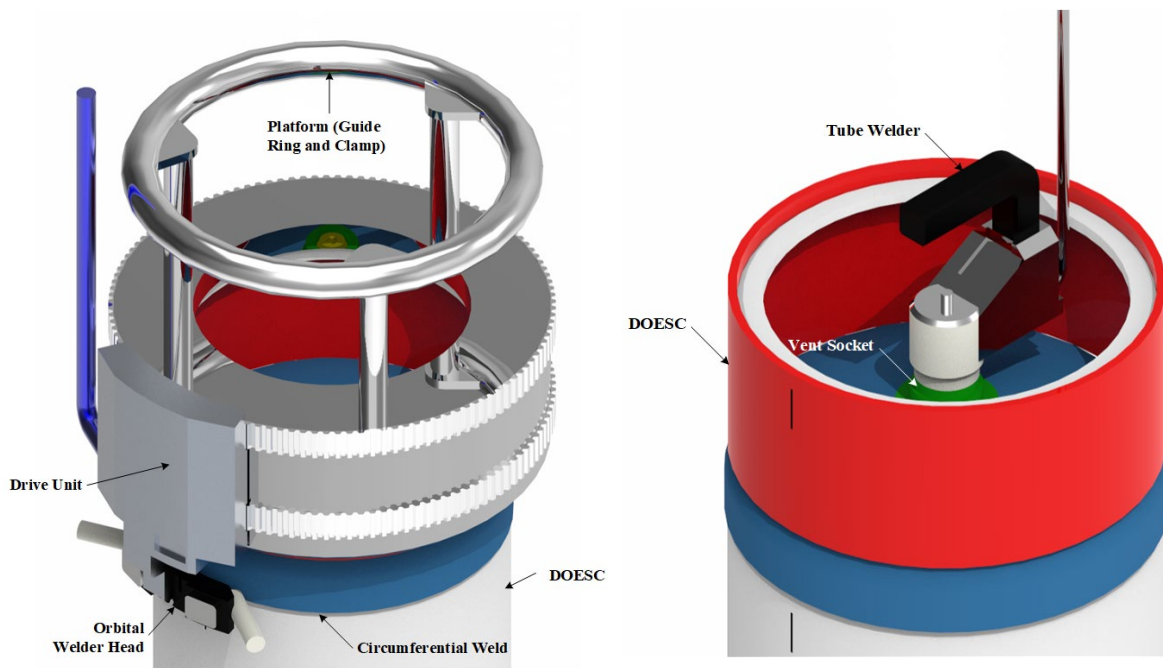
ISF circumferential orbital welder (left) and vent port tube welder (right). Adapted from³¹.
